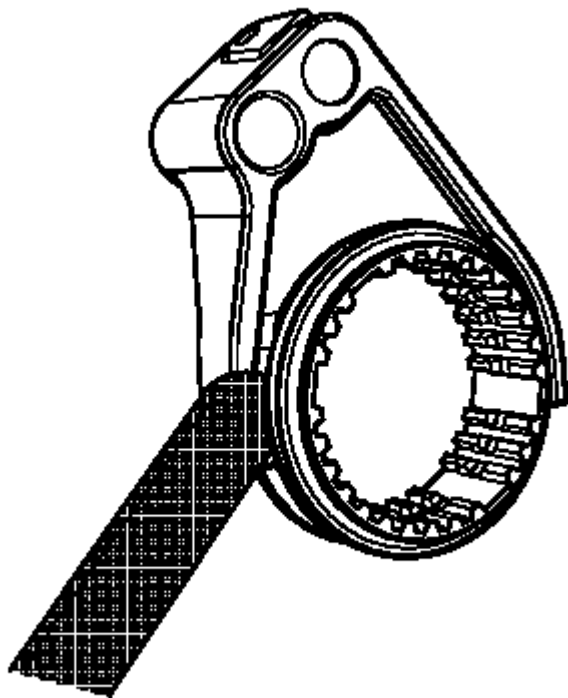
Synchronizers Cleaning And Inspection (HD)
